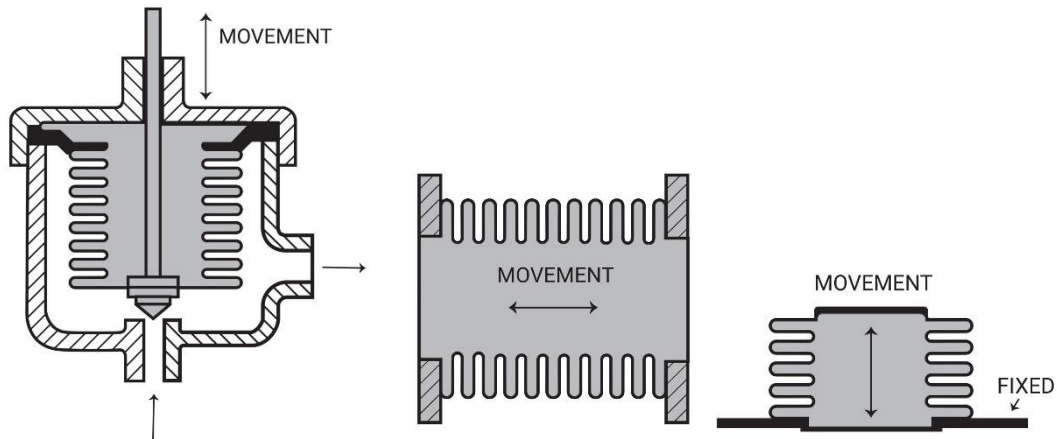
From left: packless valve, expansion joint, expansion chamber (Fulton Bellows company) [36]
